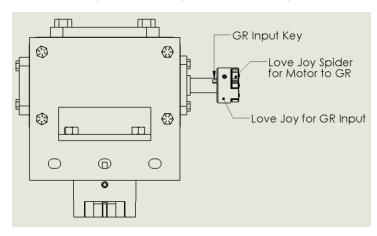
Love joy assembly connecting Gear Reducer input to Motor
